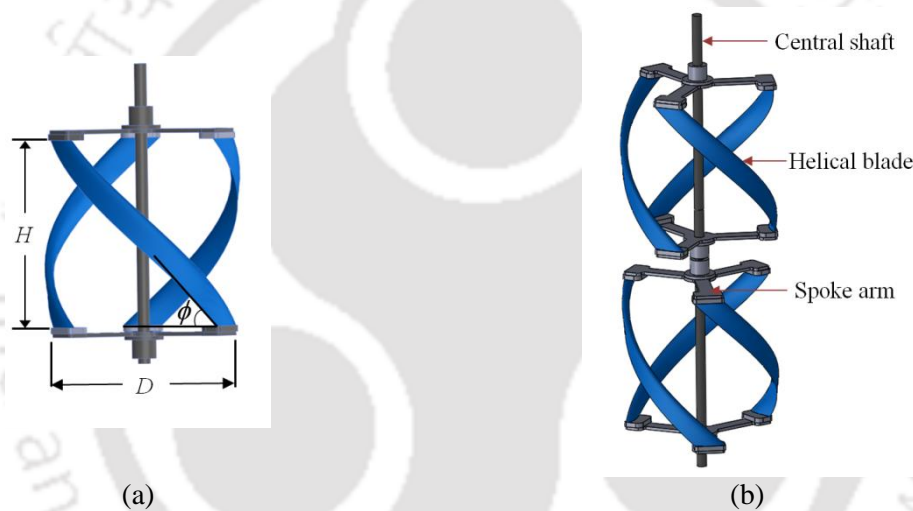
CAD models of single-step and double-step helical-bladed turbines
